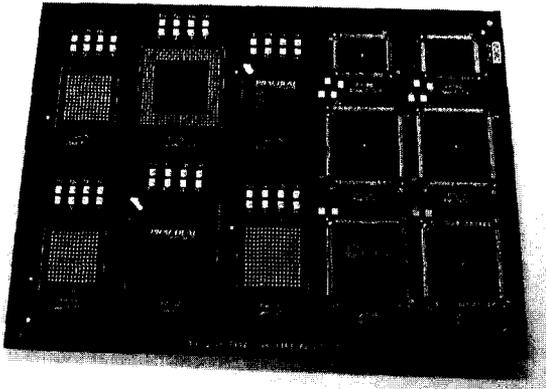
Top view of the test PWB assembled using Sn95.5Ag3.8Cu0.7
